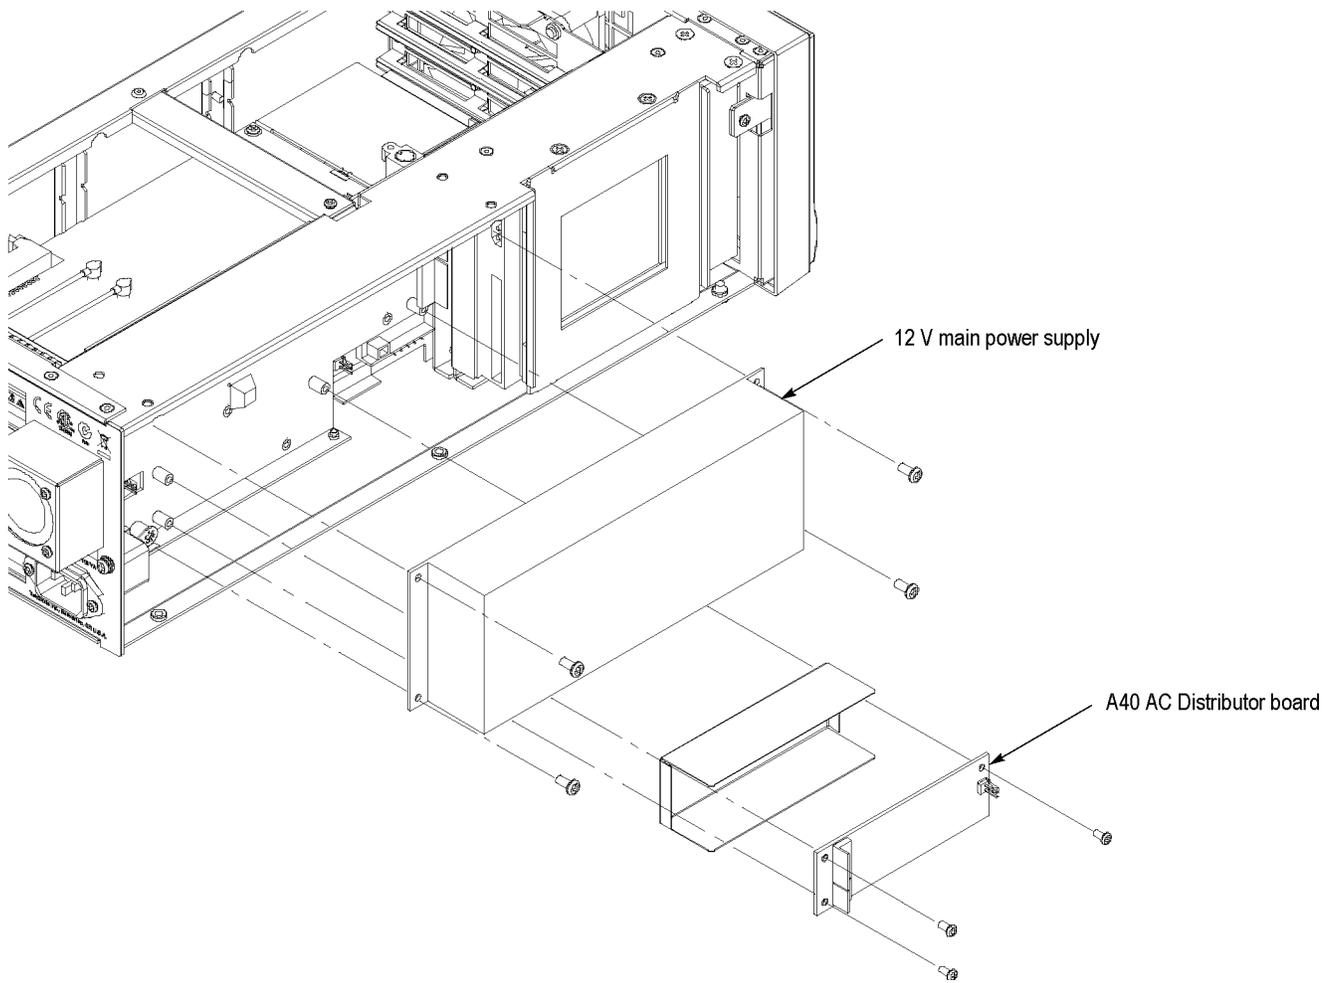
12 V main power supply and A40 AC Distributor board removal
